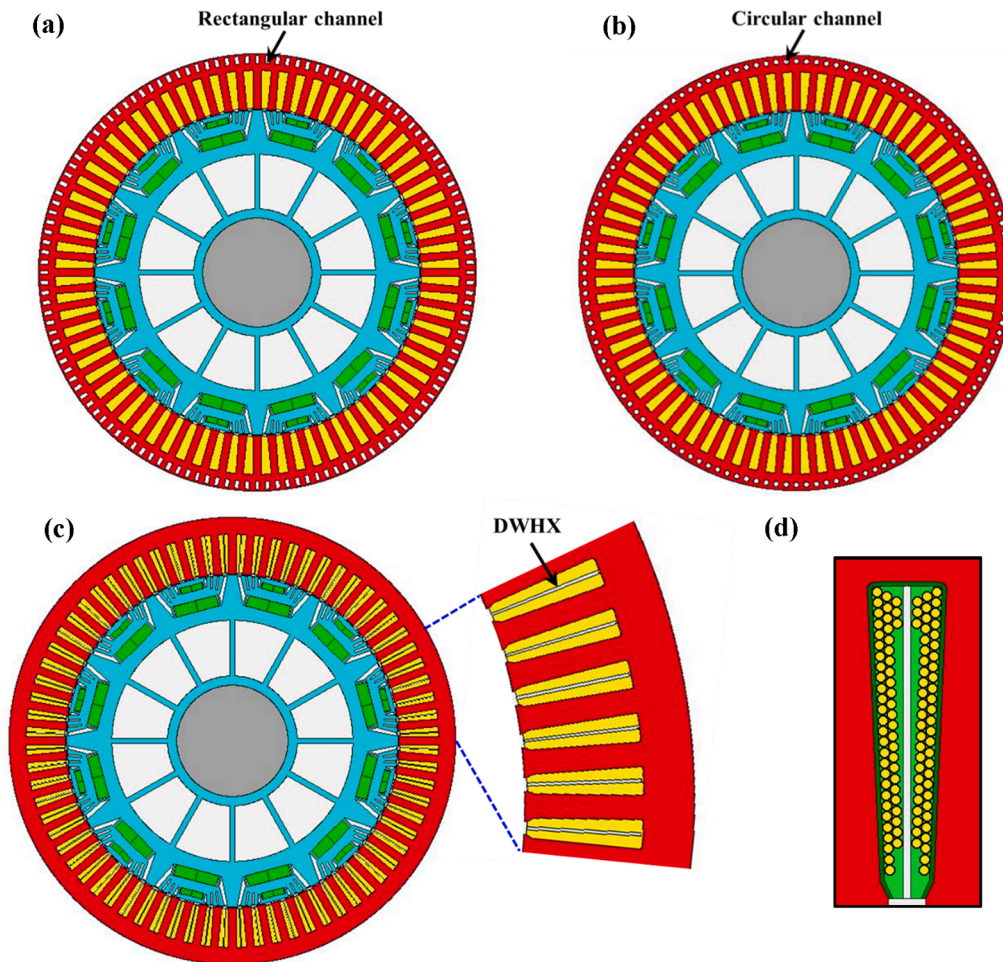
Front view of (a) rectangular channel, (b) circular channel, (c) DWHX cooled motor, and (d) copper wires distribution in a DWHX cooled motor slot.
